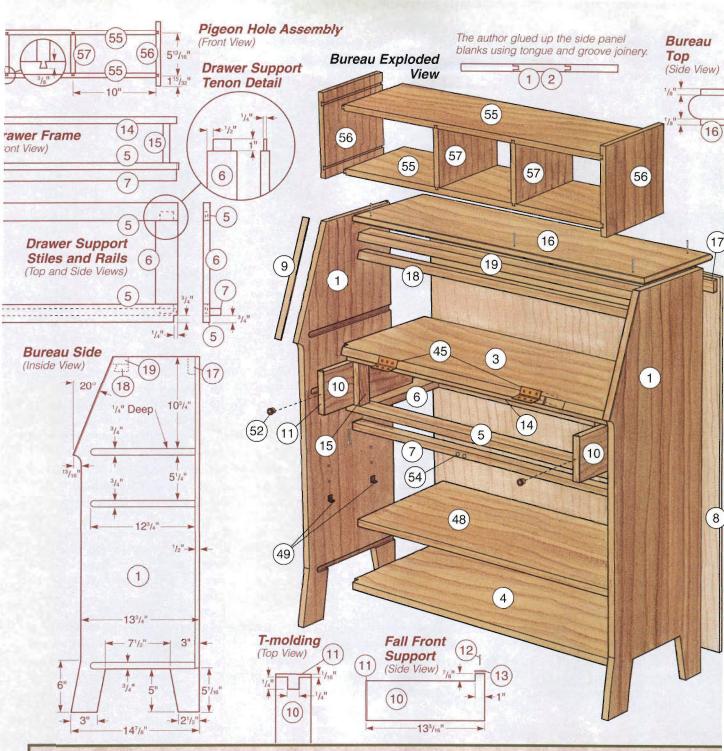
The vertical grain on the ends of the drawer supports is a T-molding ripped from the edge of a board and glued into a dado.
